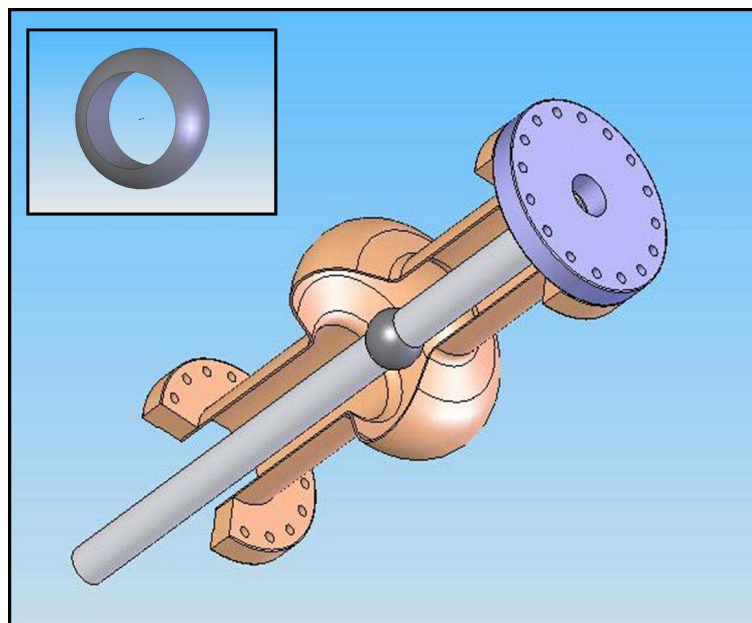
Technical 3D drawing of the cathode with the niobium ring.
